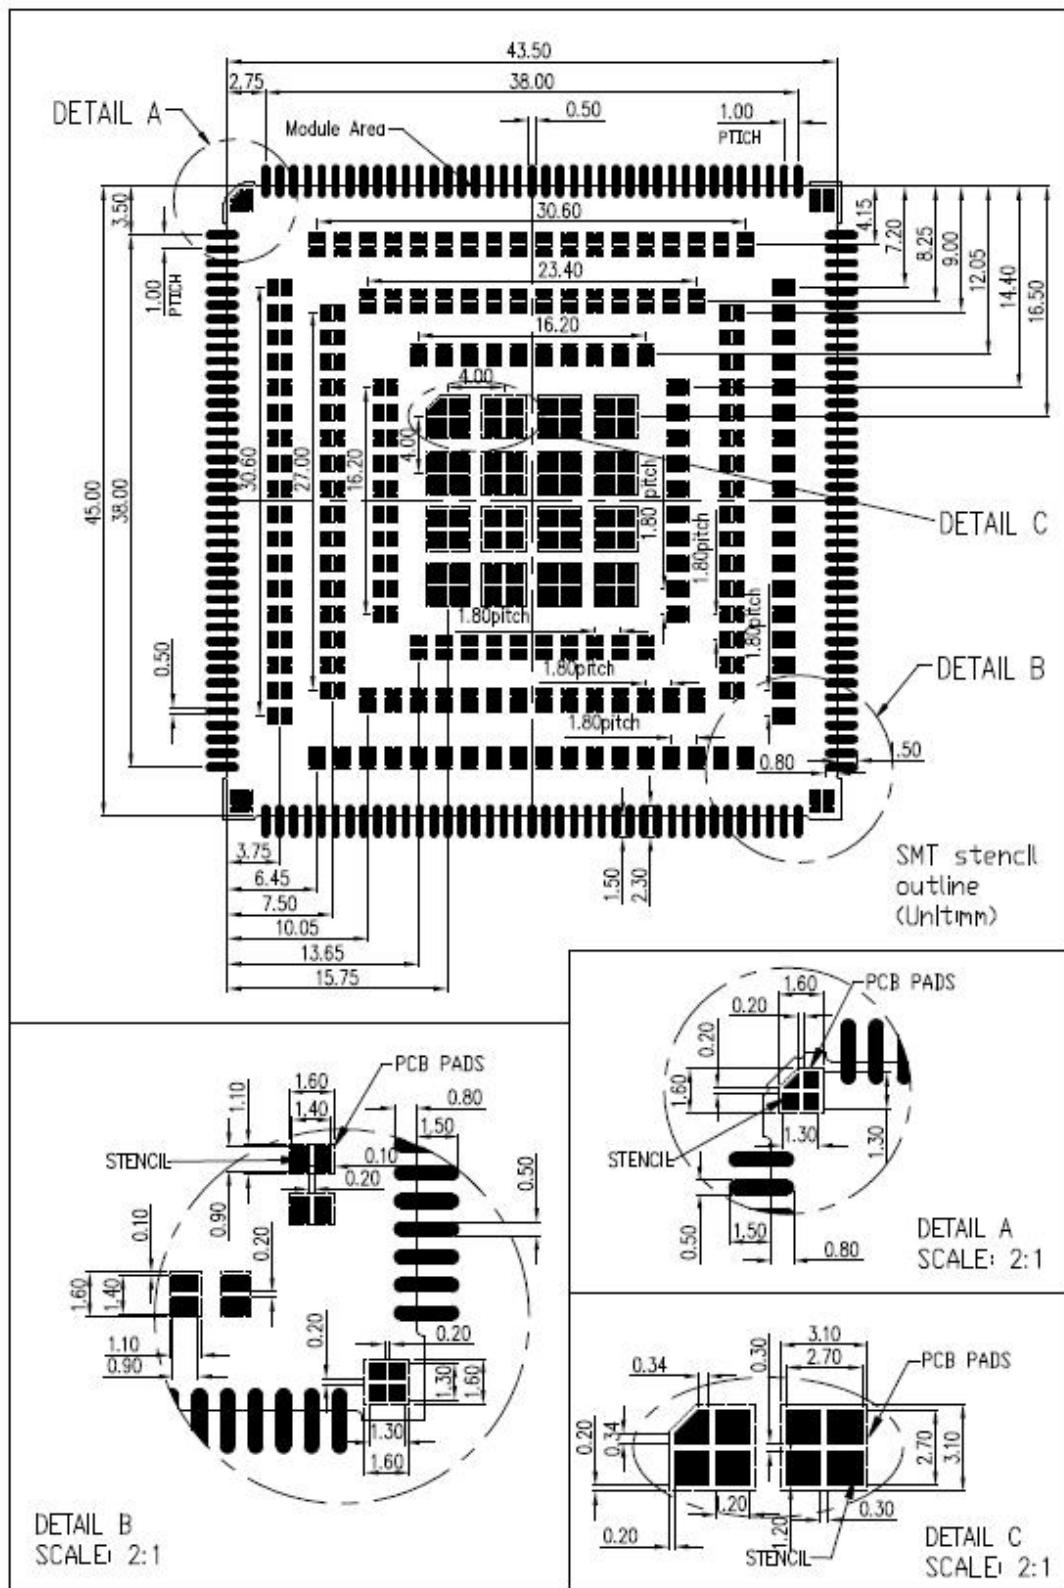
Recommend Physical SMT Stencil Drawing (Unit: mm)
